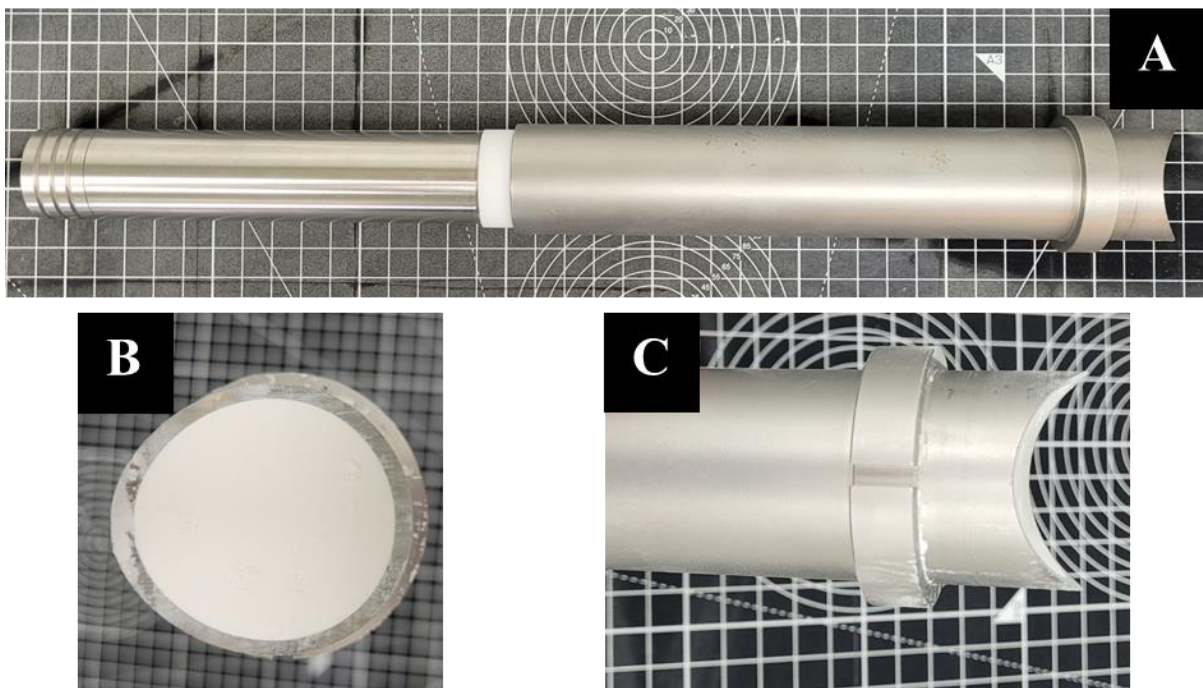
Dust Piston A) at full extension, B) Filled with Test Dust, and C) the collar and Slot for Seating the Piston in the Dust Dispersion Unit
